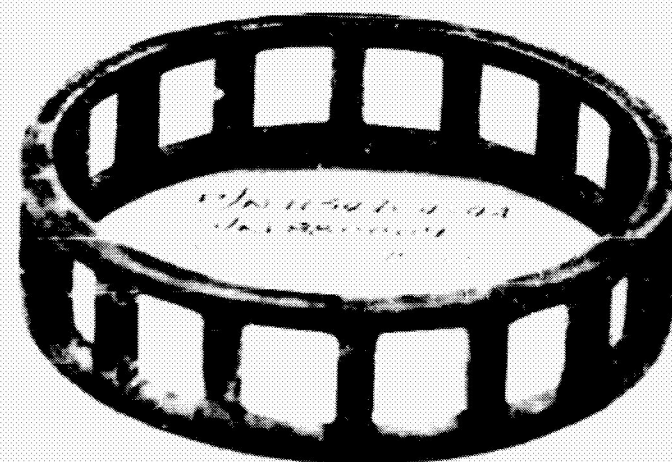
Posttest Appearance of Inside Surface of Loader Roller-Bearing Retainer After Testing
